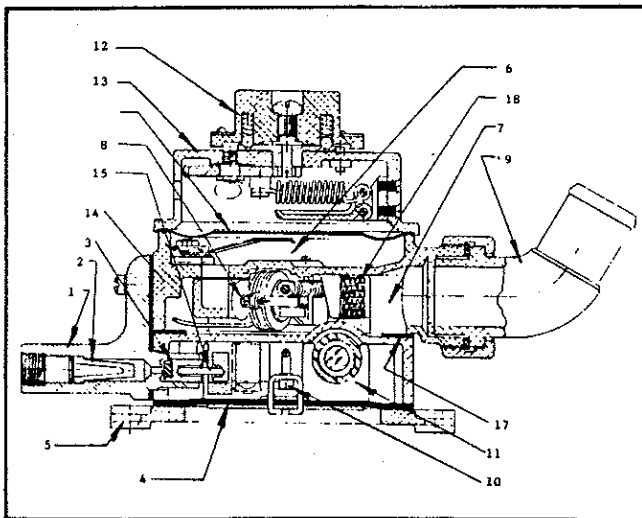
SECTIONAL VIEW - MODEL 1550
